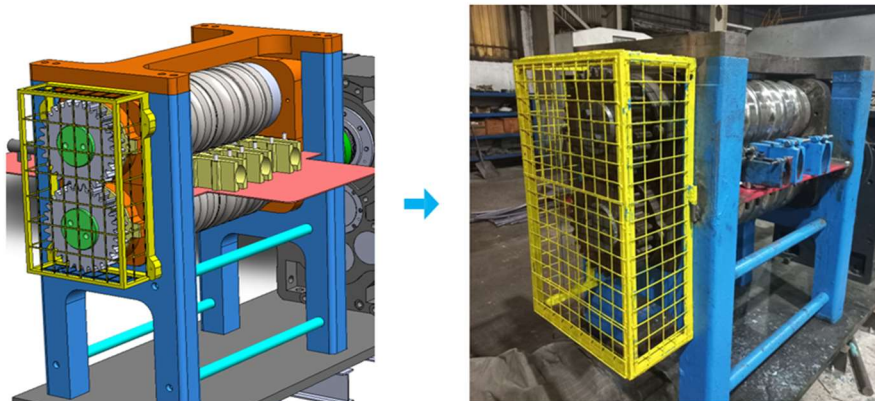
shows the laboratory-scale hot rolling unit assembled using the equipment selected based on the calculations.
